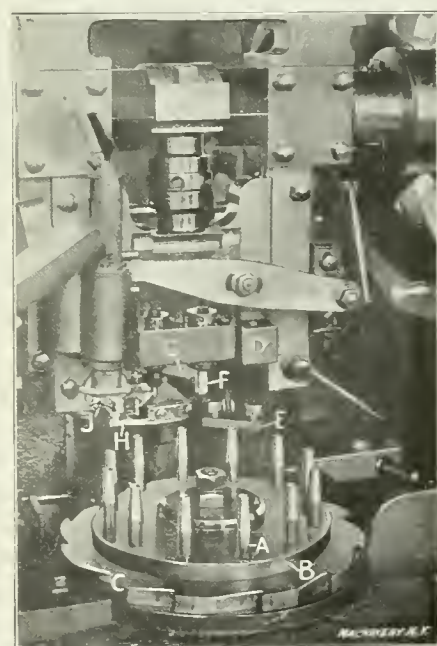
Priming Machine for Inserting the Primer in the Pocket of the Shell
